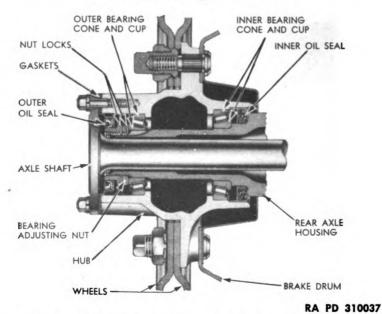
Hub at Rear Wheels, Cross-sectional View (Conventional-type Drum)
